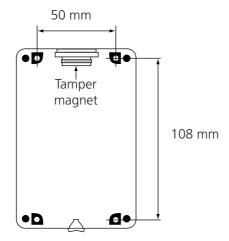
Mounting dimensions, L951A1 Antenna Unit.
